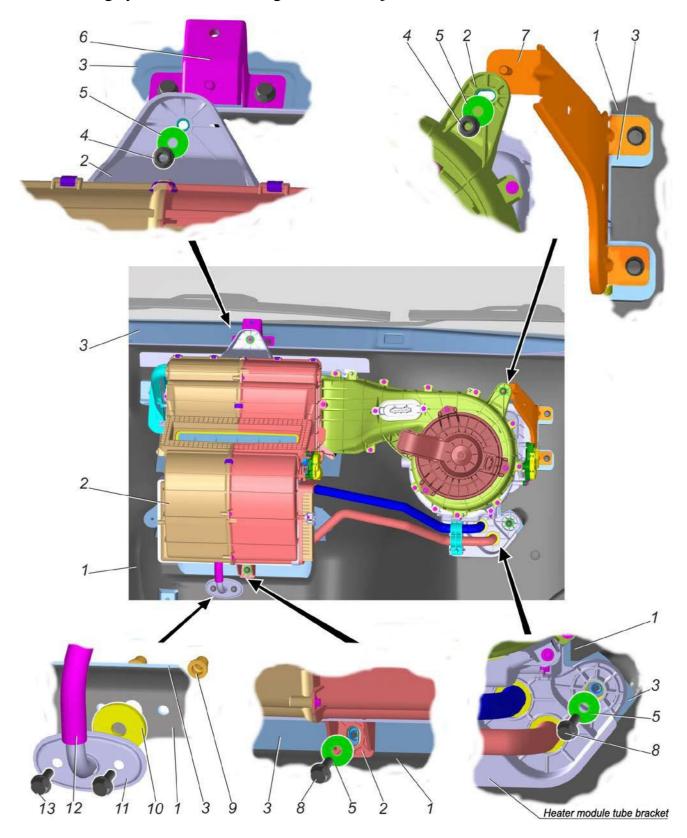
Air handling unit module installation: 1 – front panel sound insulation; 2 – air handling unit module; 3 – front panel; 4 – nuts; 5 – washers; 6 – bracket; 7 – fan bracket; 8, 13 – bolts; 9 – threaded rivet; 10 – drain branch pipe seal; 11 – drain branch pipe; 12 – condensate drain pipe
